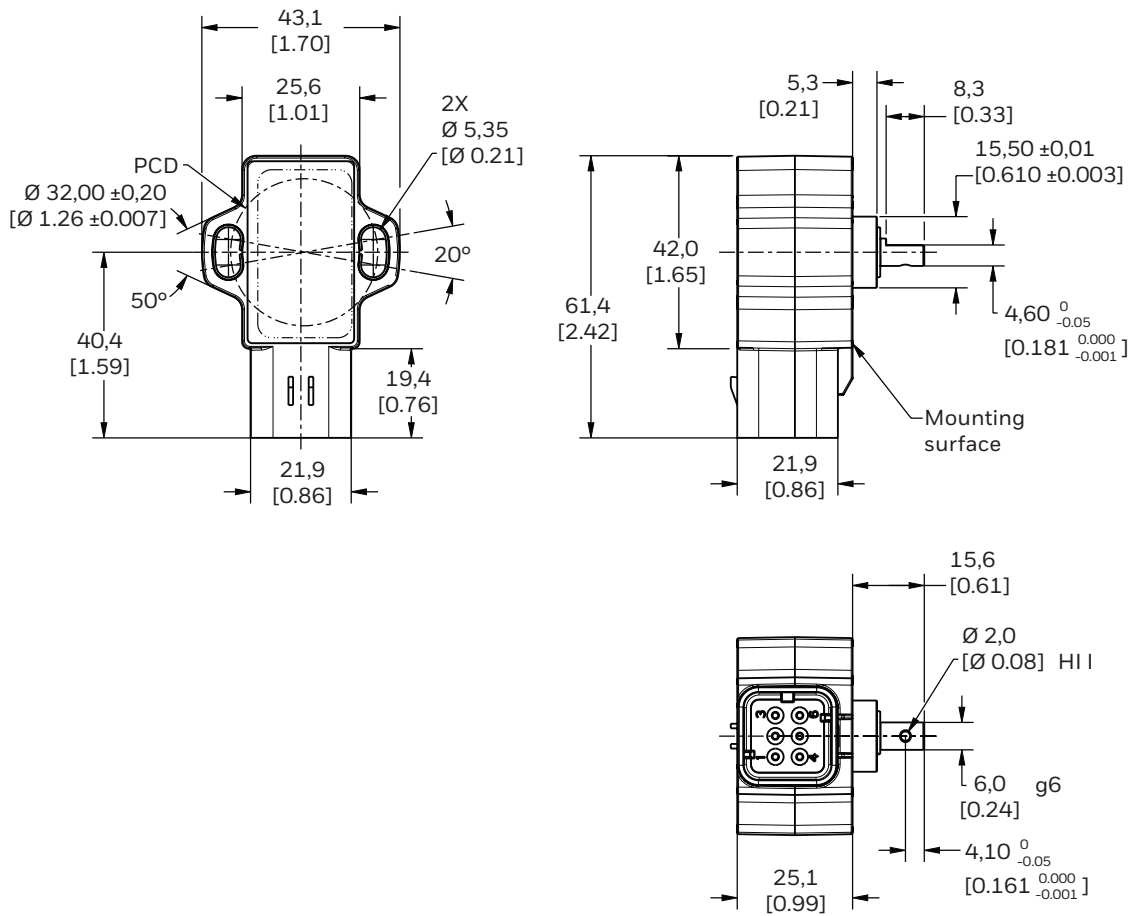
Dimensional Drawings for Sensor with Lever A (For reference only: mm [in])
